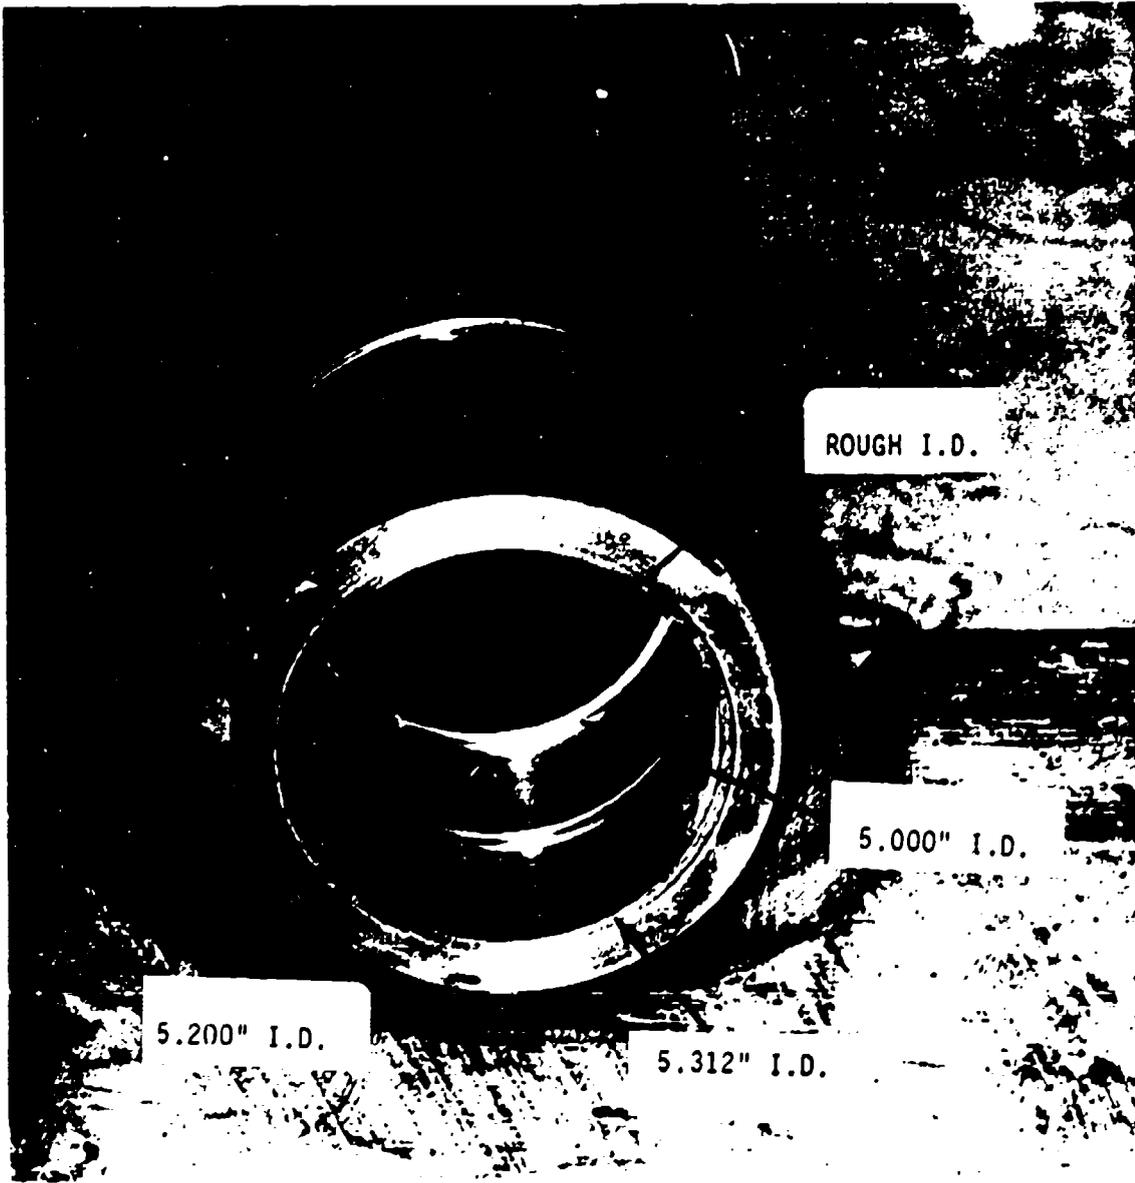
Titanium beta-C test cylinder counterbored to accommodate boring heads.
